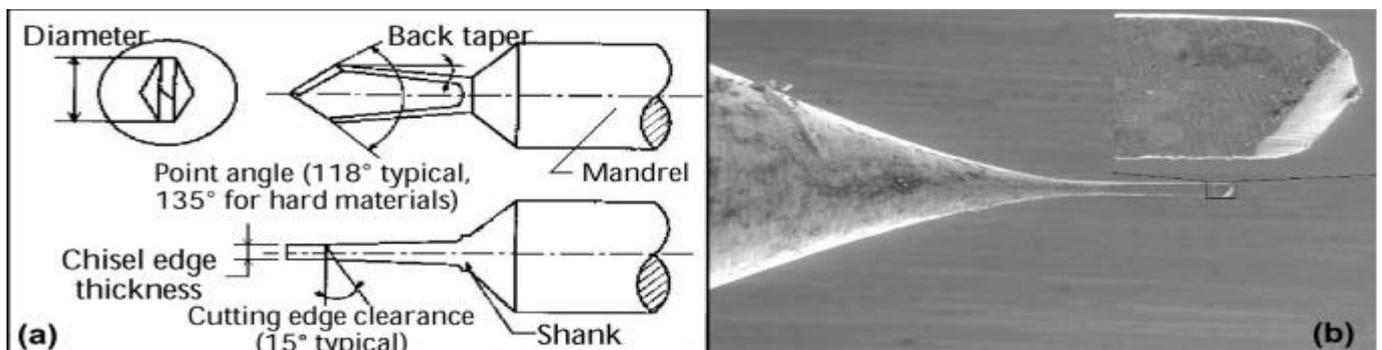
Spade type micro drill(a) General geometry (b) Cutting part[32]
